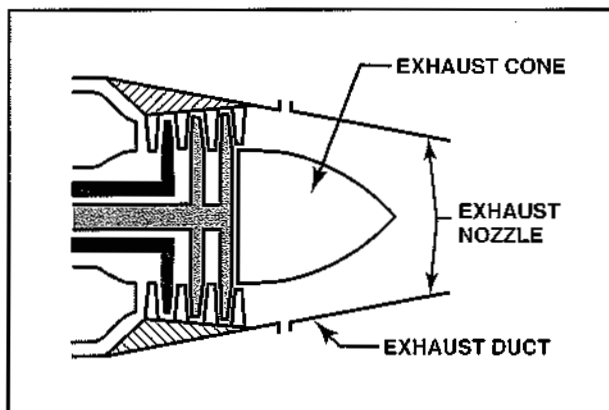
The components of the exhaust section include the exhaust cone assembly, the exhaust duct (or tailpipe) when required, and the exhaust (or jet) nozzle.
